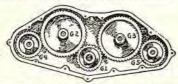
End view of the cam gears and drive gear. The two cam gears (G2, G3) are called "half-time" gears, because they revolve just one-half the time, or revolutions, that the drive gear (G1) revolves. G1 is drive gear on crank shaft. G3 is cam gear for inlet cam shaft. G2 are shaft. G4 and G5 are extra gears to drive the magneto and generator ("T"-head engine).
